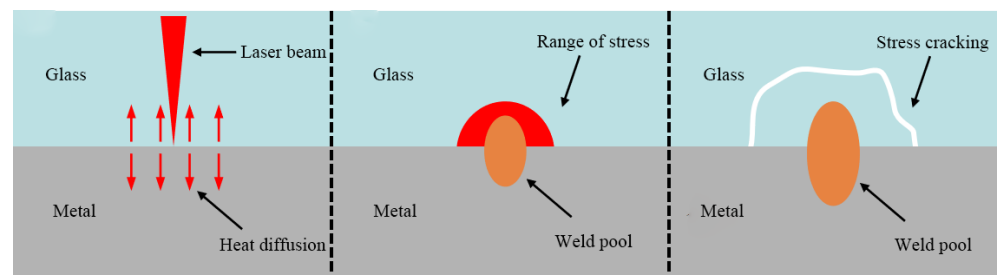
A schematic diagram of the welding process illustrates the fracture surface on the glass side.
